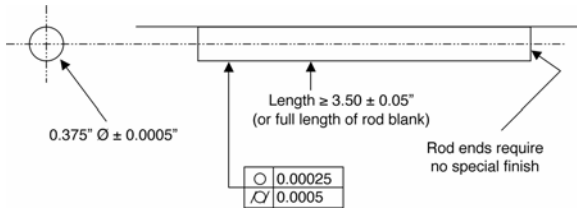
Schematic of RCF specimen geometry. This specimen is used in 3BOR RCF tests.
